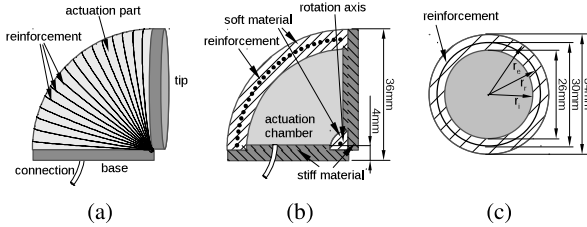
Single module design. a) side view, b) side cross-section, c) front cross-section.
